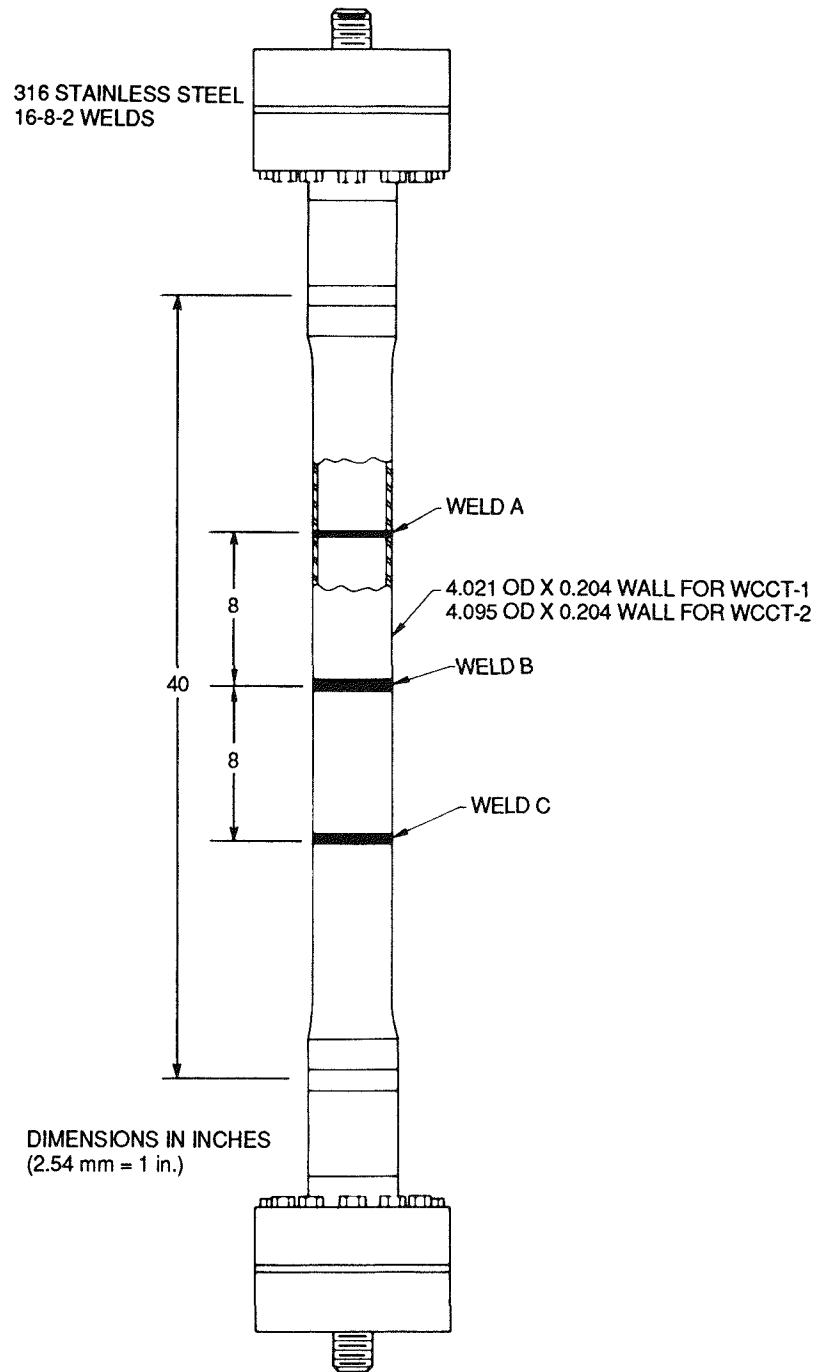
Welded cylinder creep specimens and associated grips
